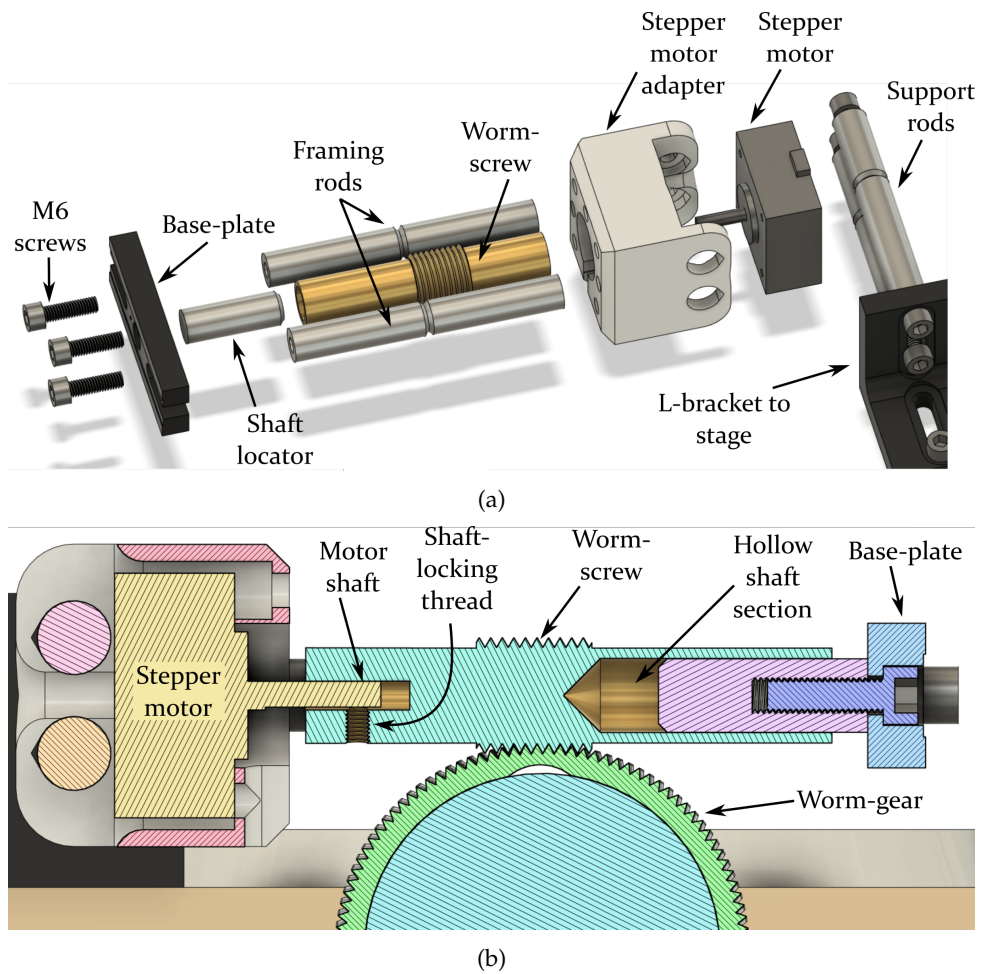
CAD drawings of the Y-axis assembly. (a) Exploded view of the motor assembly. (b) Cross section view of the motor assembly, through the centre of the worm-screw and bisecting the worm-gear.
